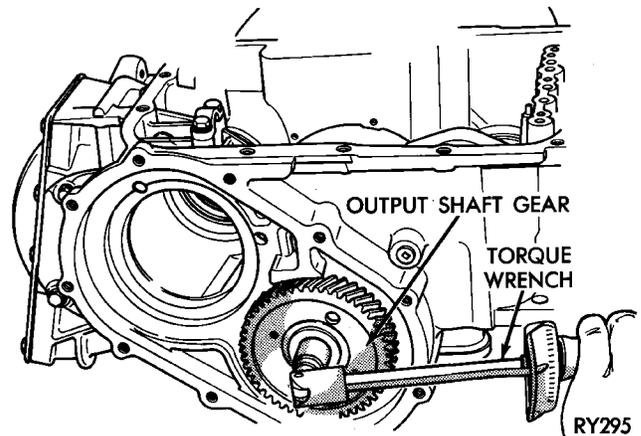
Start Output Shaft Gear onto Output Shaft
